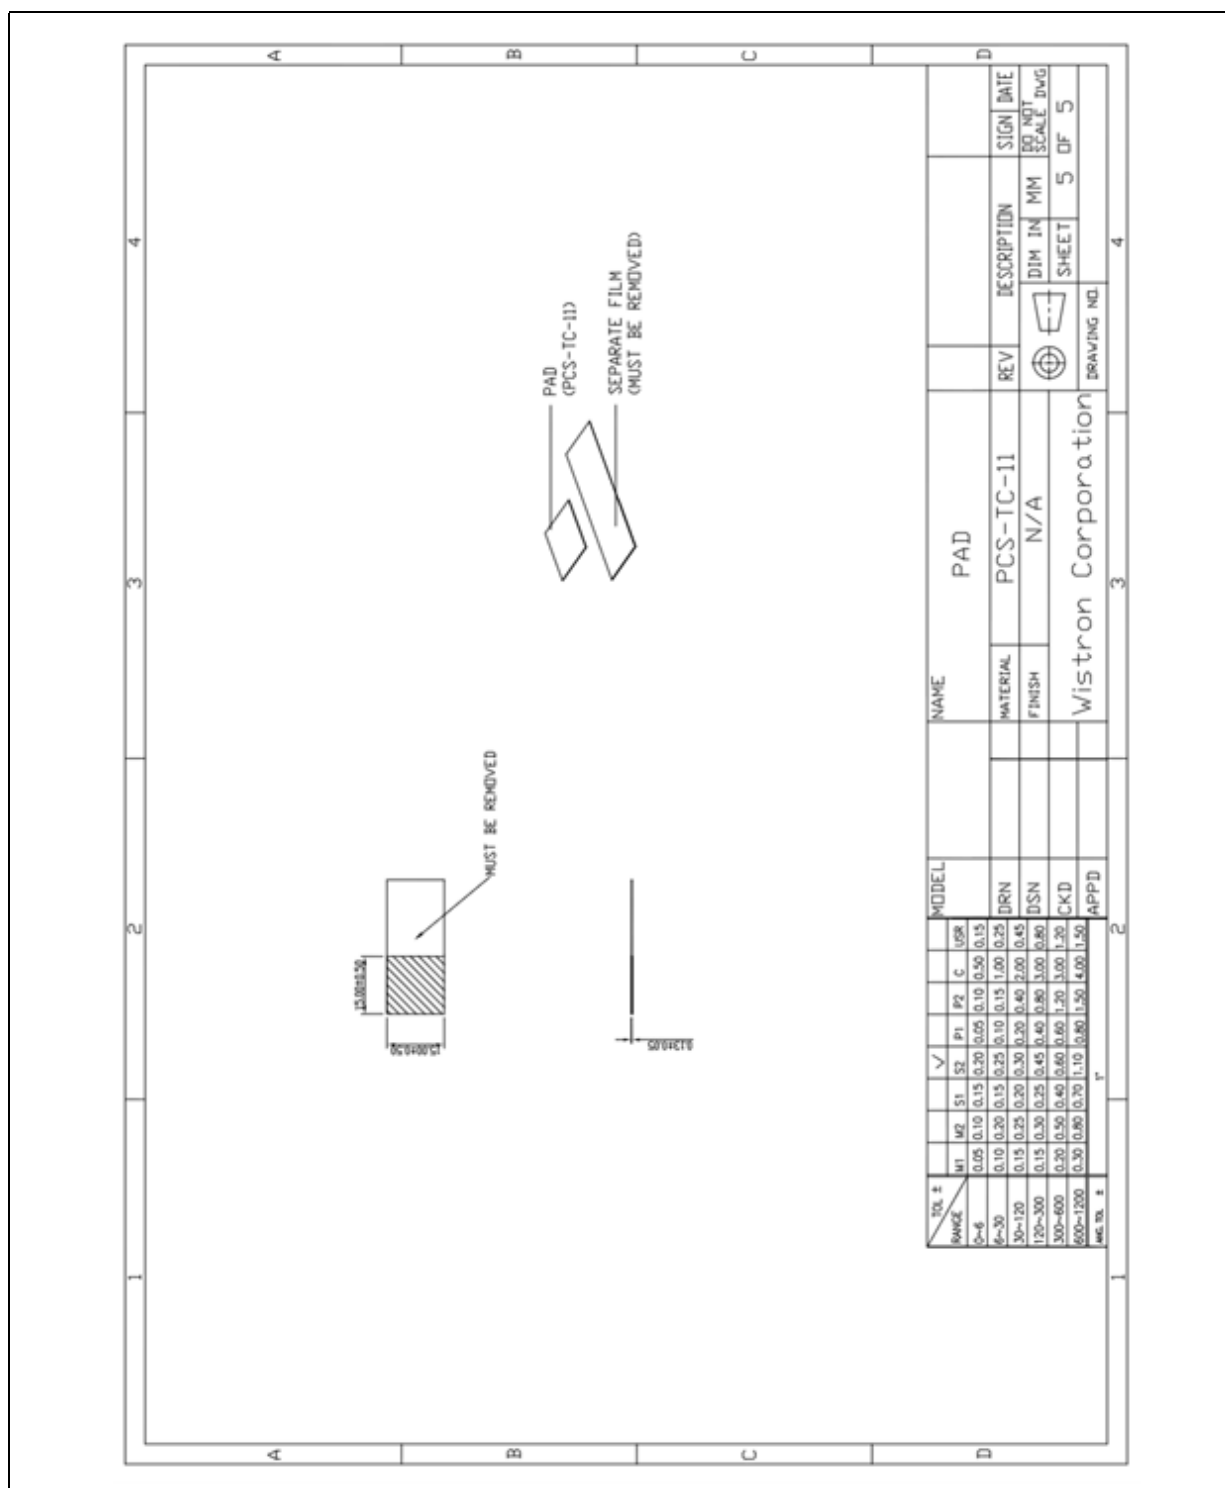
Low-Profile Torsional Clip Heatsink TIM Pad Drawing
